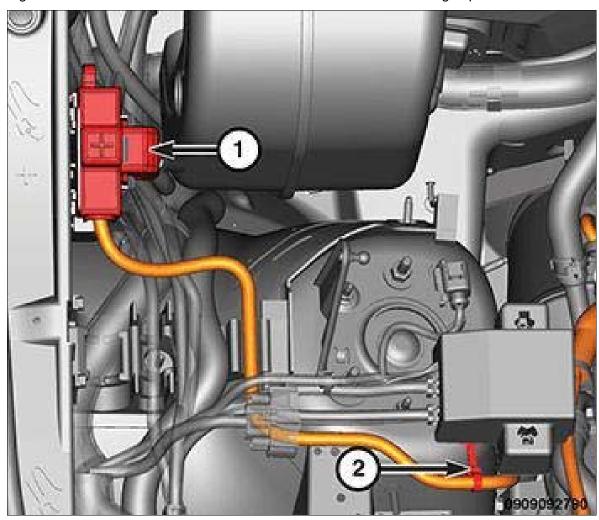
Positive Starter And Alternator Cable & Wire Harness Retaining Clips
